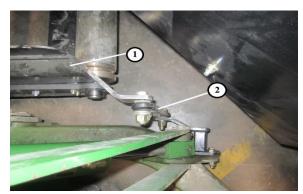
Link Arm Mounting Key 1 – Front Belt Key 2 – Link Arm
